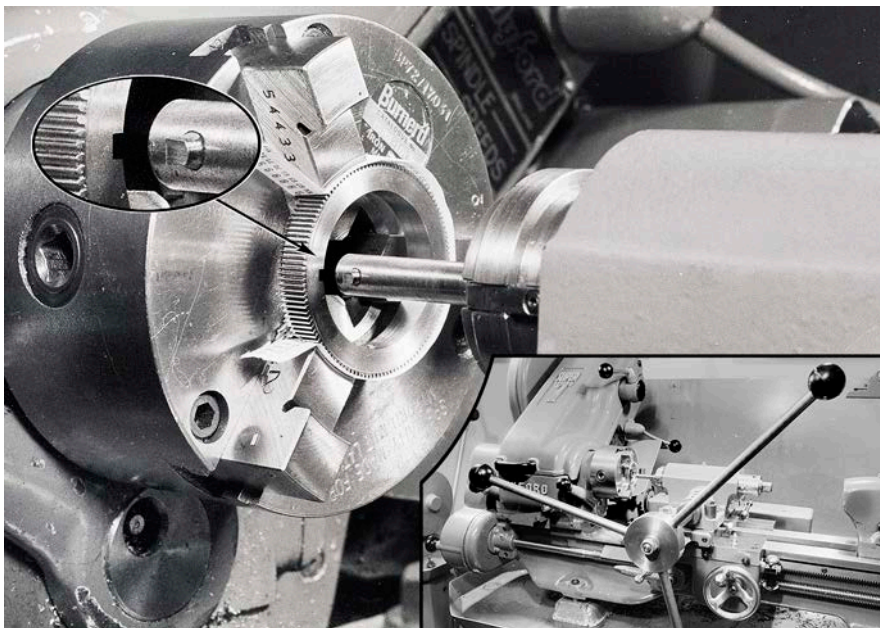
Slotting the keyway in the 65T sun wheel held in soft jaws in the 3-jaw chuck
